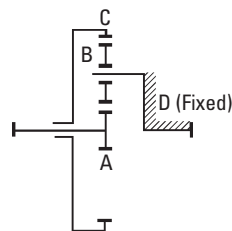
(c) Star Type Planetary Gear Mechanism
